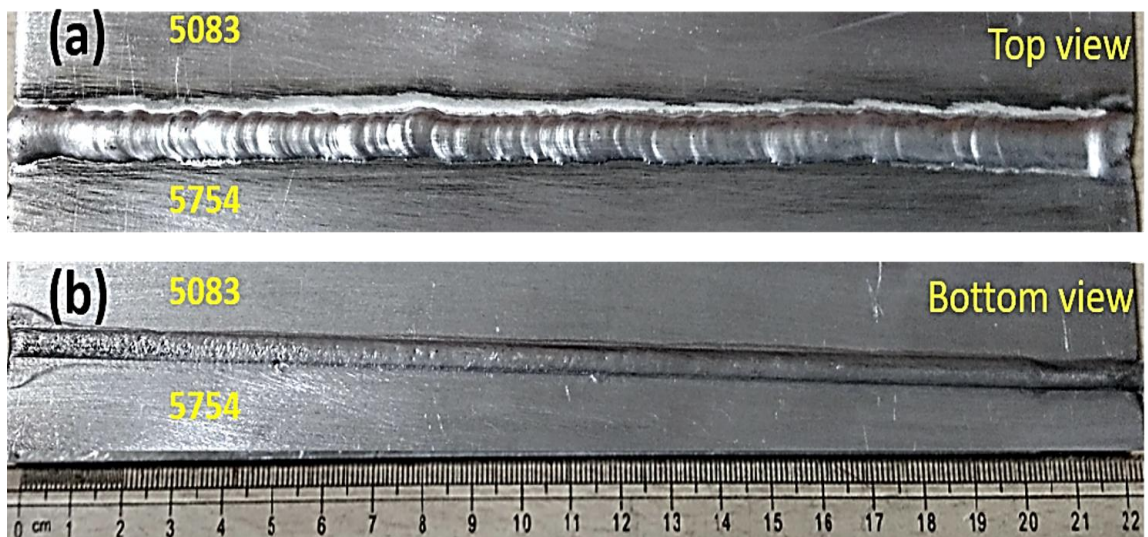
Top and bottom views of the CMT welded A5754-H111 and A5083-H111 joint using ER5356 filler wire
